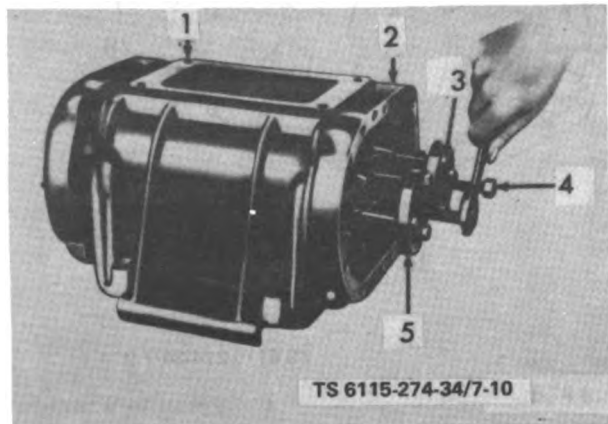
Rotor Shafts, Rear Bearings and Front Plate, Removal and Installation
